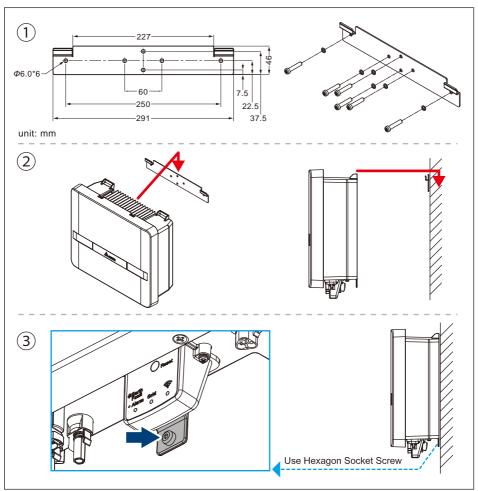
Attaching the mounting bracket for H2.5 / H3 / H3A / H4A / H5A
